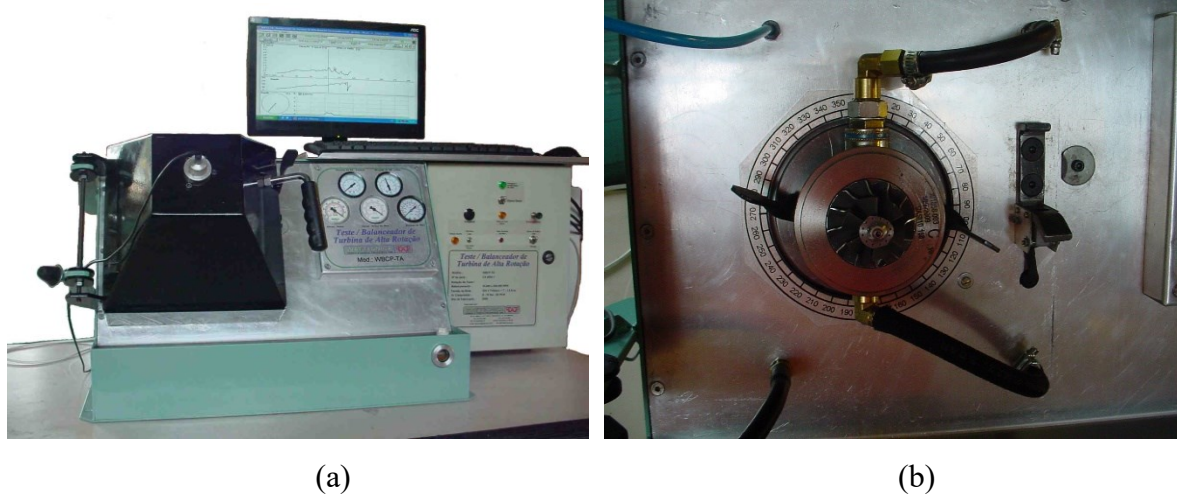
The cold balancing machine (a) with the protection cover, and (b) detail of rotor-bearing assembly coupled to the machine.
